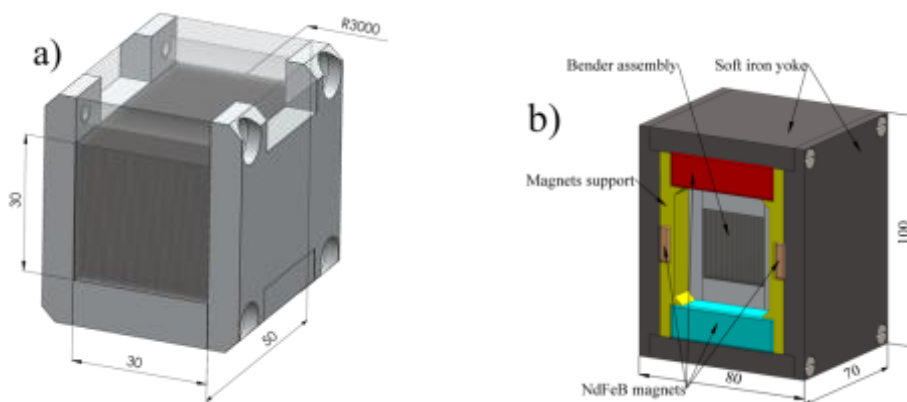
a) Solid state bender assembly with external dimensions; b) Magnetic assembly of the bender.
